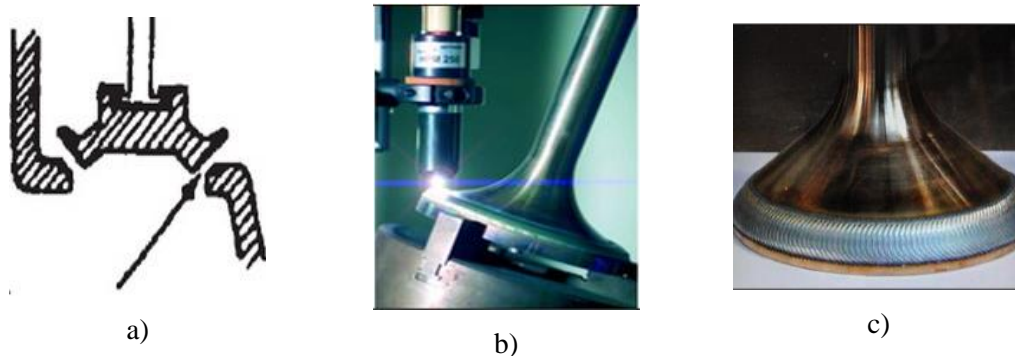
a) Contact surfaces between valve and seat, b) Surface during cladding, c) Cladded surface at the edge of motor engine valve
